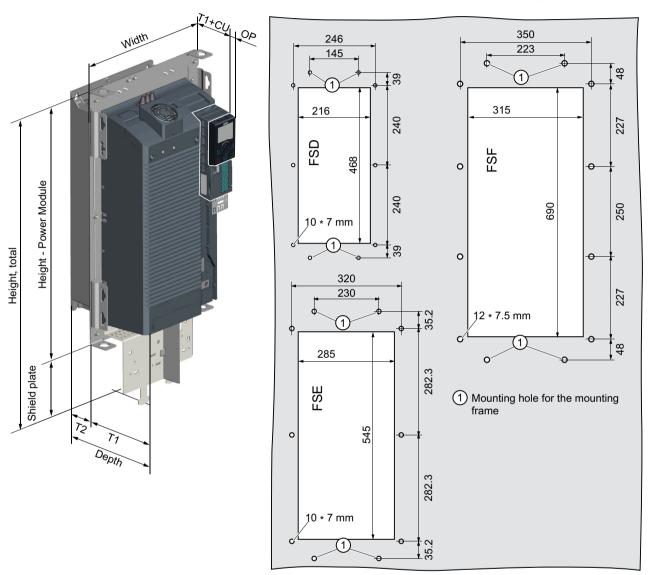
Dimension drawing and drilling dimensions for frame sizes FSD ... FSF
